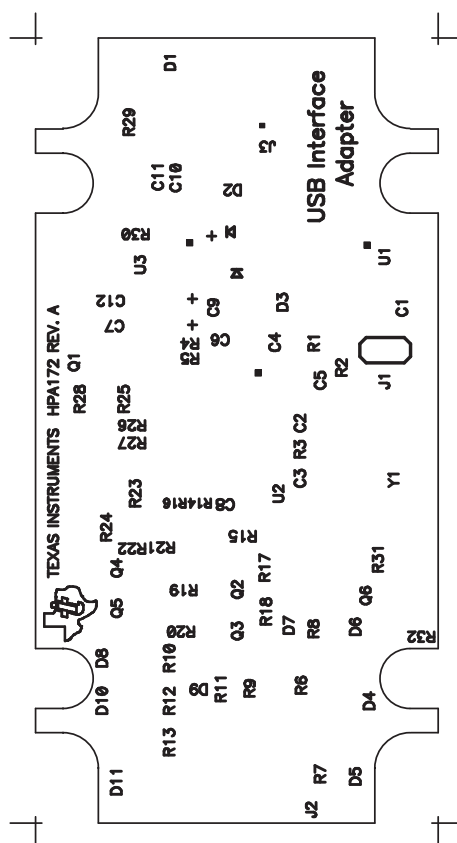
PCB Layout — Top S1 (Silkscreen Layer)
